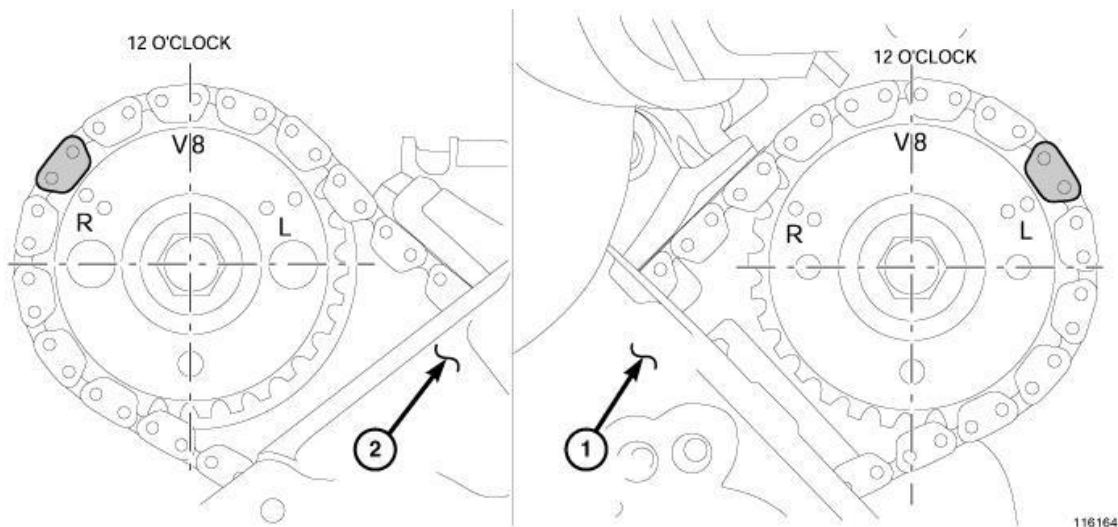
V8 Timing Mark On Camshaft Sprocket
